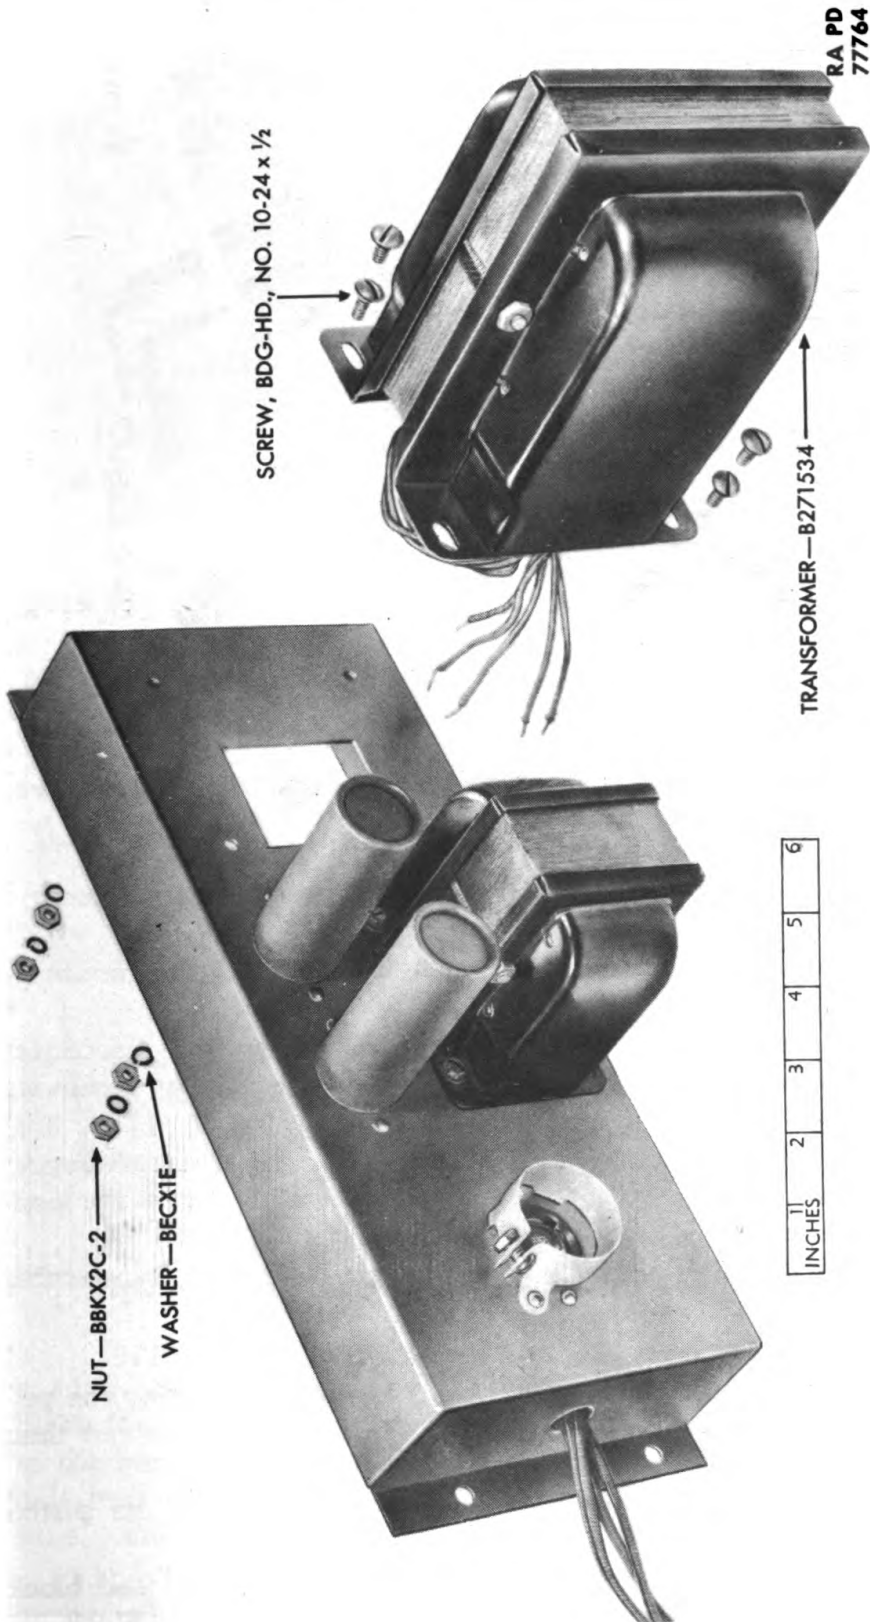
Removal of Power Transformer From Power Supply Chassis
